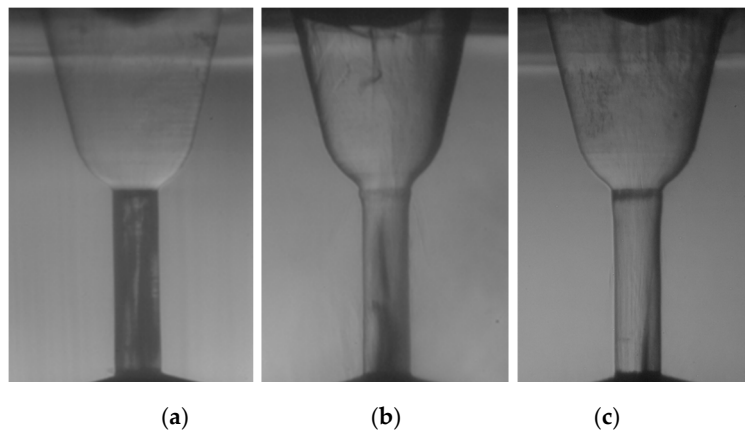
Actual geometries of transparent nozzles: (a) Nozzle A, Basic geometry; (b) Nozzle B, Basic geometry with hydro-erosive grinding (short step); (c) Nozzle C, Basic geometry with hydro-erosive grinding (long step).
